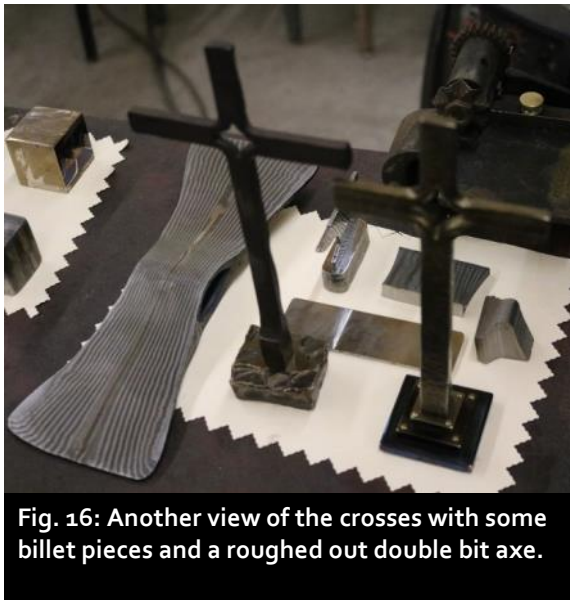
Another view of the crosses with some billet pieces and a roughed out double bit axe.
